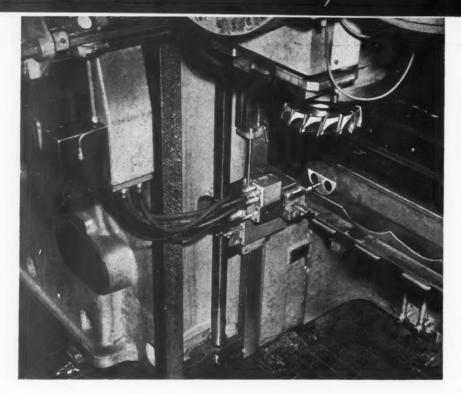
The tracer control valve is mounted on the rise and fall slide adjacent to the table and can be quickly removed by taking off a valve plate. The hydraulic hose connections remain intact as the plate is moved from one position to another
